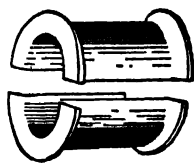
Babbitt bushings used in connecting-rod bearings.
